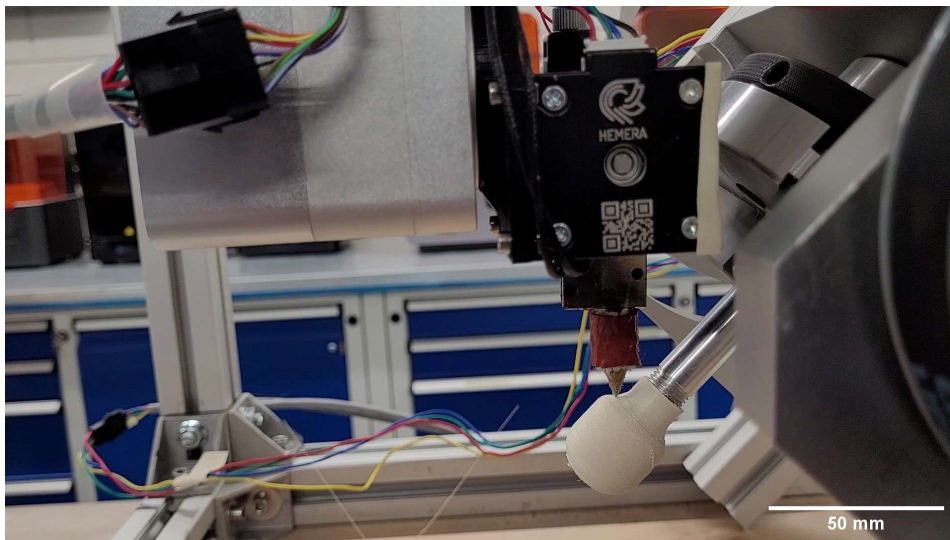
Threaded rod length is required to create clearance between the printhead and 3 chuck vice in the printing orientation shown in this figure.
